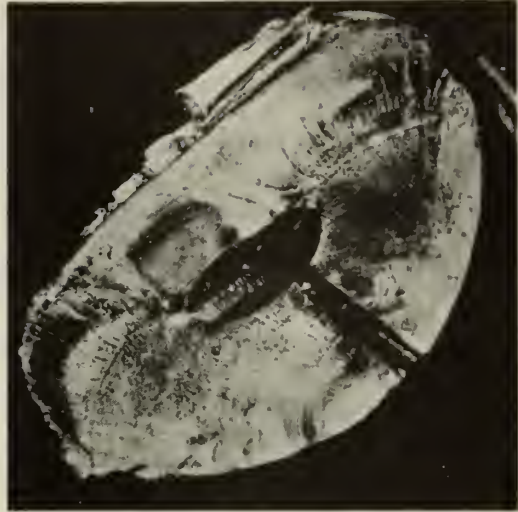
FAILURE OF CRANKSHAFT JOURNAL /18/
